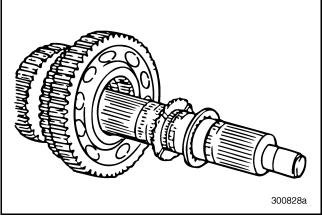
Removing Internal-Toothed and External-Toothed Thrust Washers (T313L/T318L Shown)
